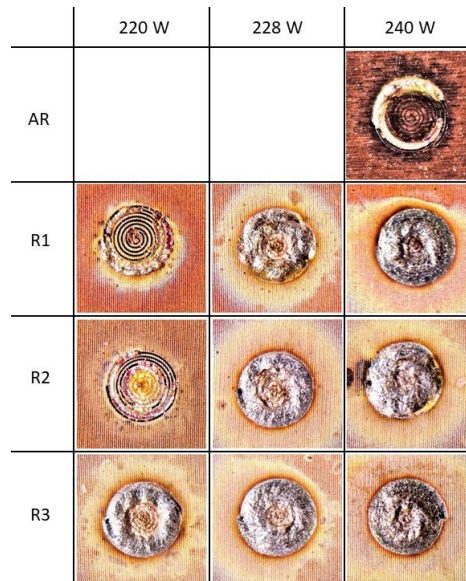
Top view of the welding beads of different samples regarding power and surface condition.
